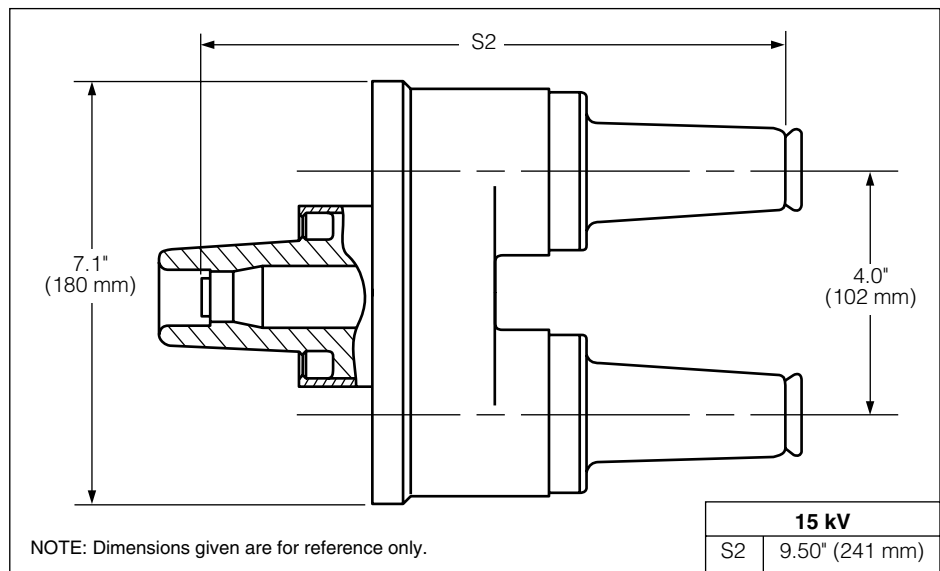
Rotatable Feedthru Insert stacking dimensions.
